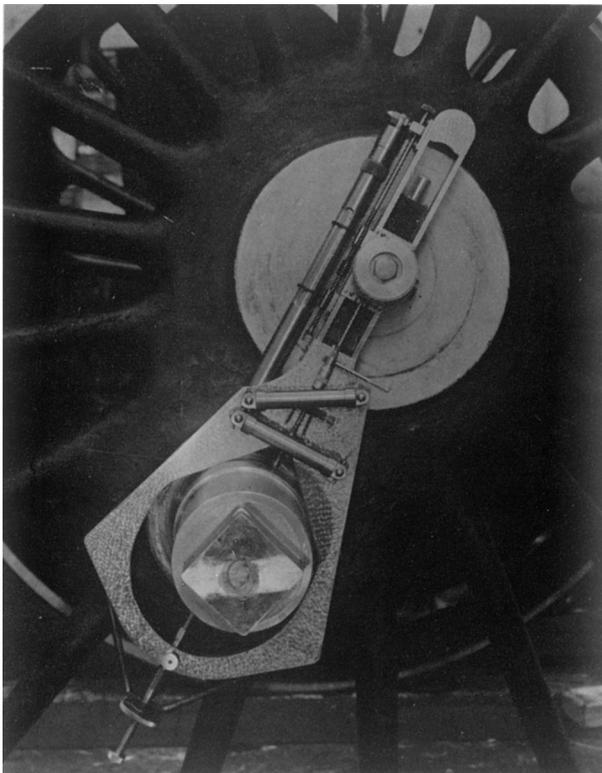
Crankpin quartering gauge modified to deal with crank pins set at 120.
